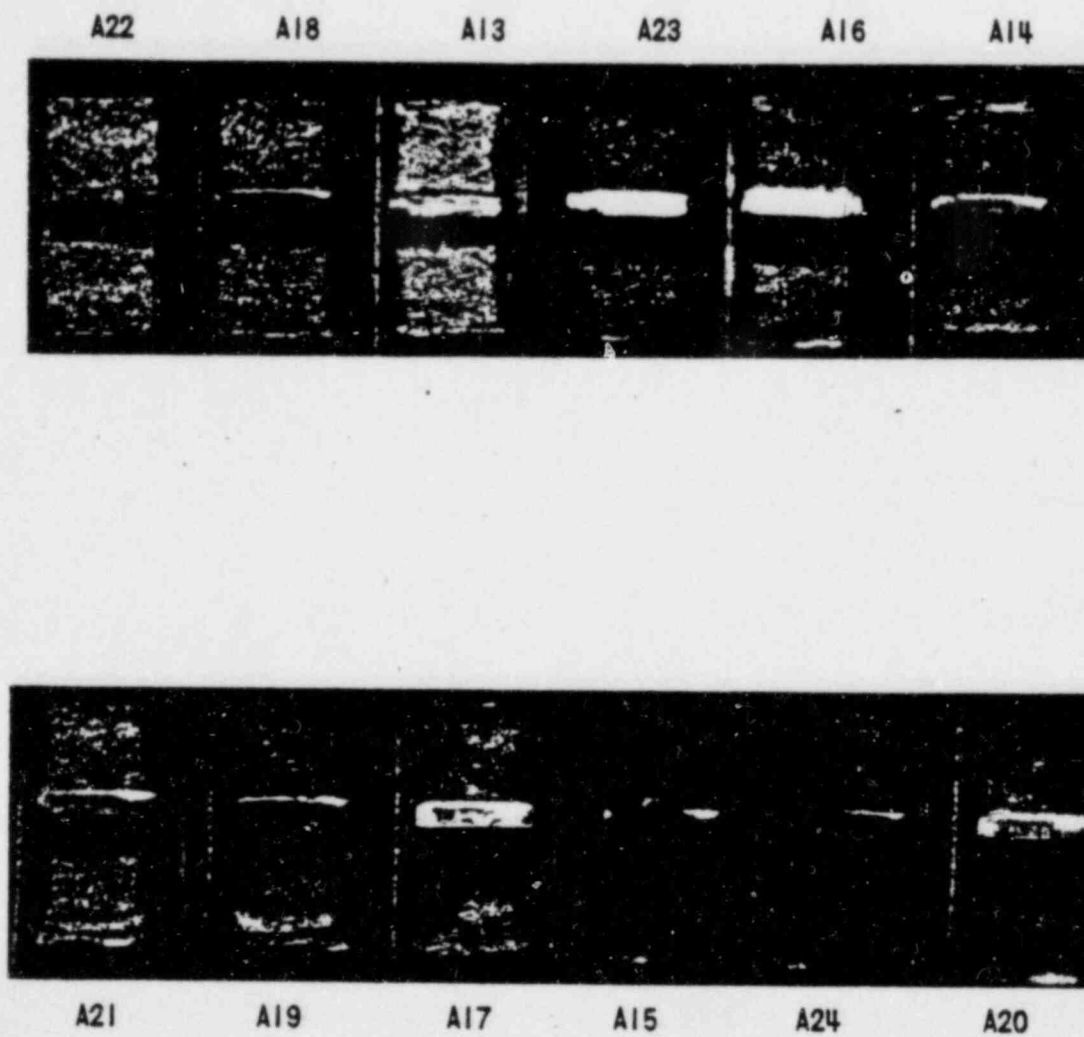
Charpy Impact Specimen Fracture Surfaces for Point Beach Unit No. 1 Pressure Vessel Shell Plate A9811
